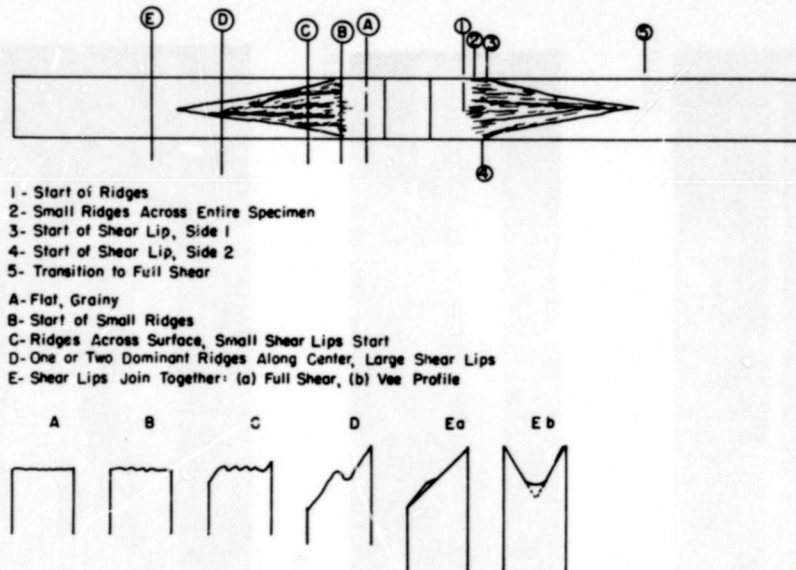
SCHEMATIC DRAWING OF FRACTURE SURFACE FEATURES, PRIMARILY 1/4- AND 1/2-INCH-THICK SPECIMENS
